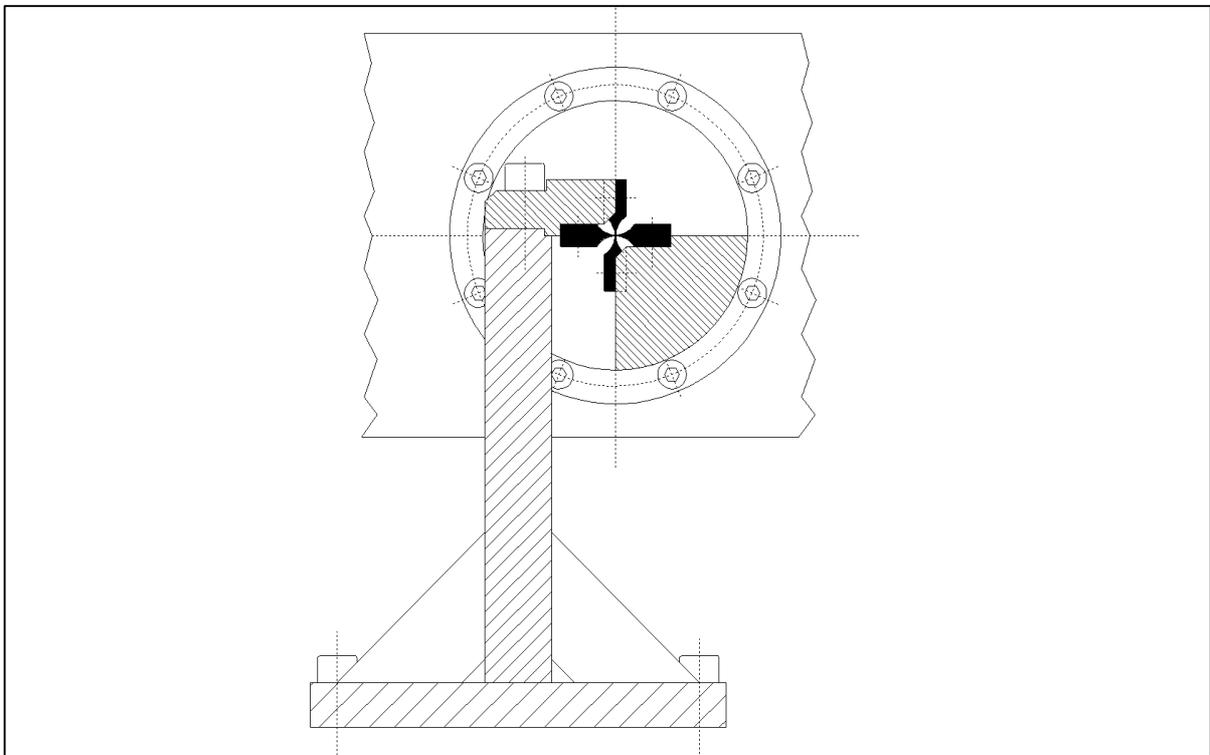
Crossed-hour-glass shaped flexure strip (strain controlled elastic hinge)
